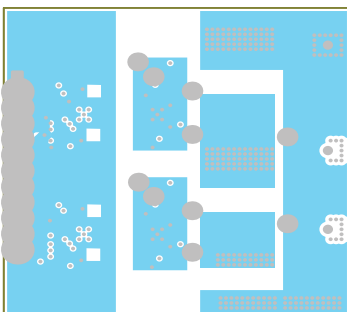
APEK85003K18ES-04-MH PCB Copper Layers
